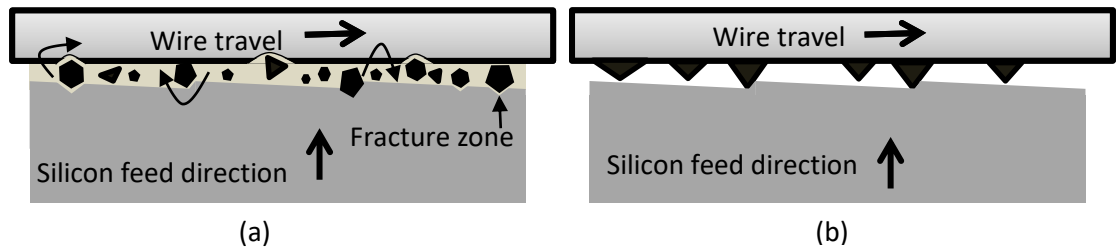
(a) Rolling indenting mechanism in LAS, (b) Scratching and material removal in DWS.
